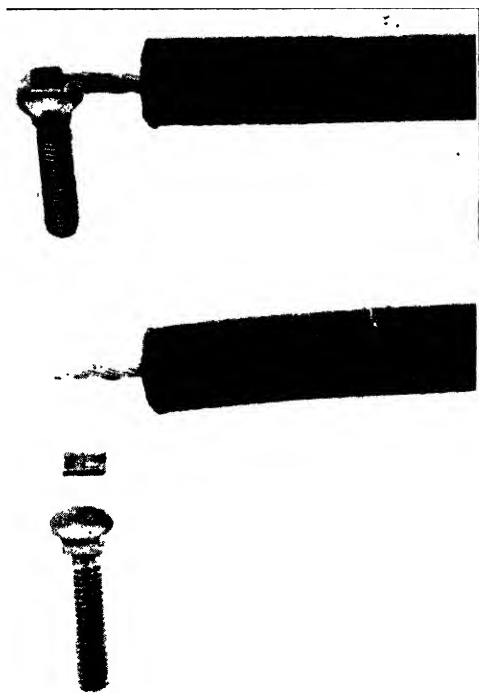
Silver-brazed primary lead assembly for potential transformer, before and after brazing.
